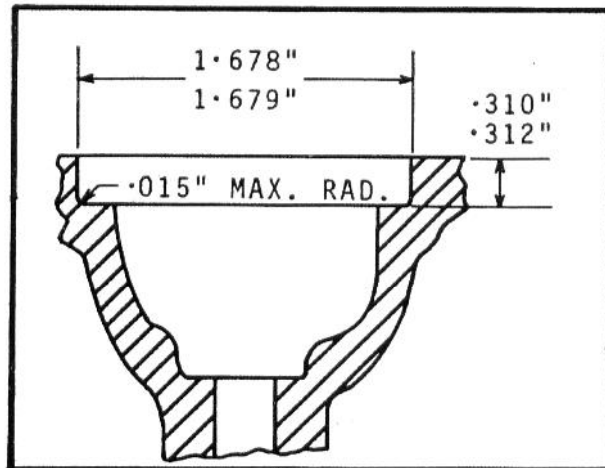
Machining Dimensions for Exhaust Valve Seat Inserts
